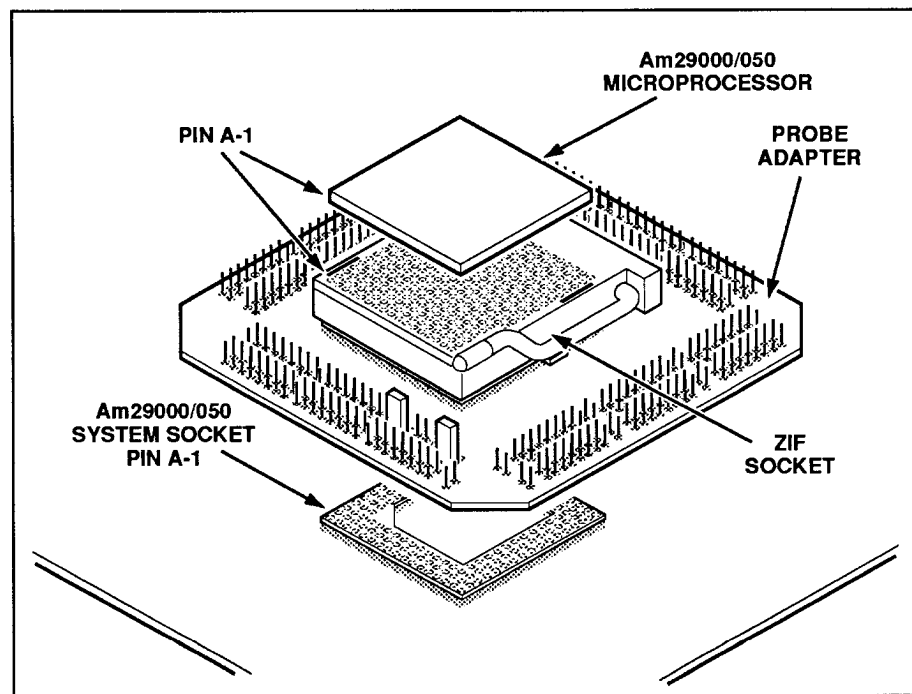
Placing the probe adapter in the Am29000/050 system. The clock and 8-channel probes should already be connected before placing the probe adapter in the system. They are not shown connected in this figure because they obscure the detail.
